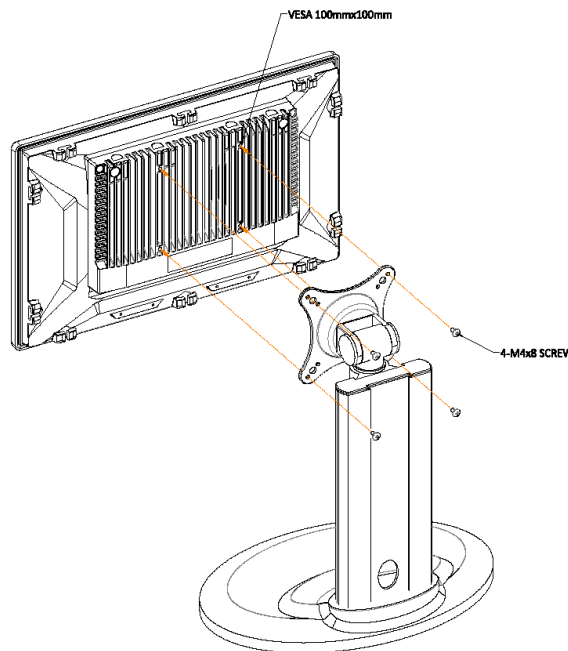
AUHMI-816B/AUHMI-821B VESA Mounting
